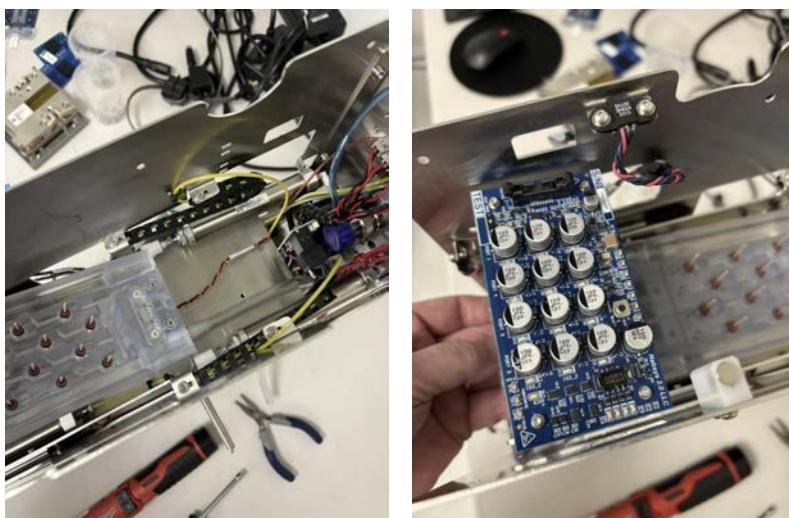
Drain tube and memory cable in the tray (left) and sliding the manifold into position (right).
